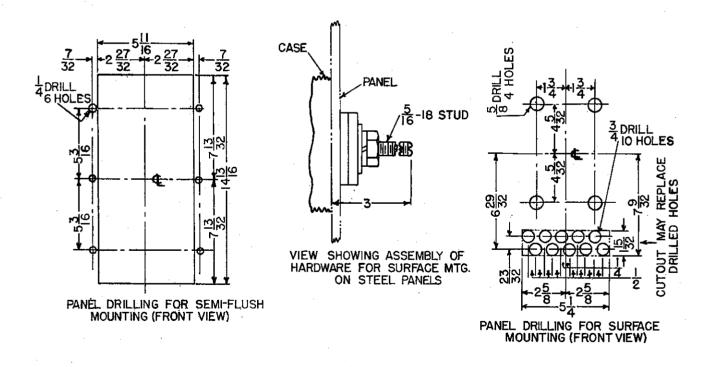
Outline and Panel Drilling Dimensions for the Type CEY12A Relay
